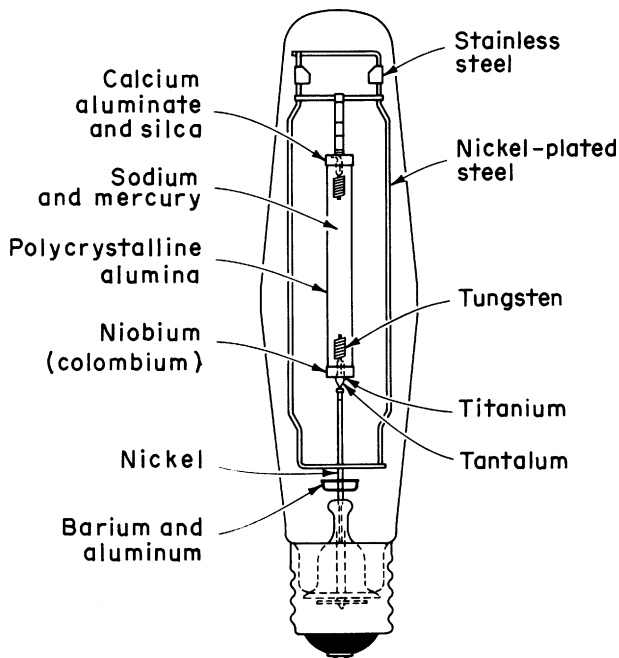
Construction of a typical high-pressure sodium lamp.
